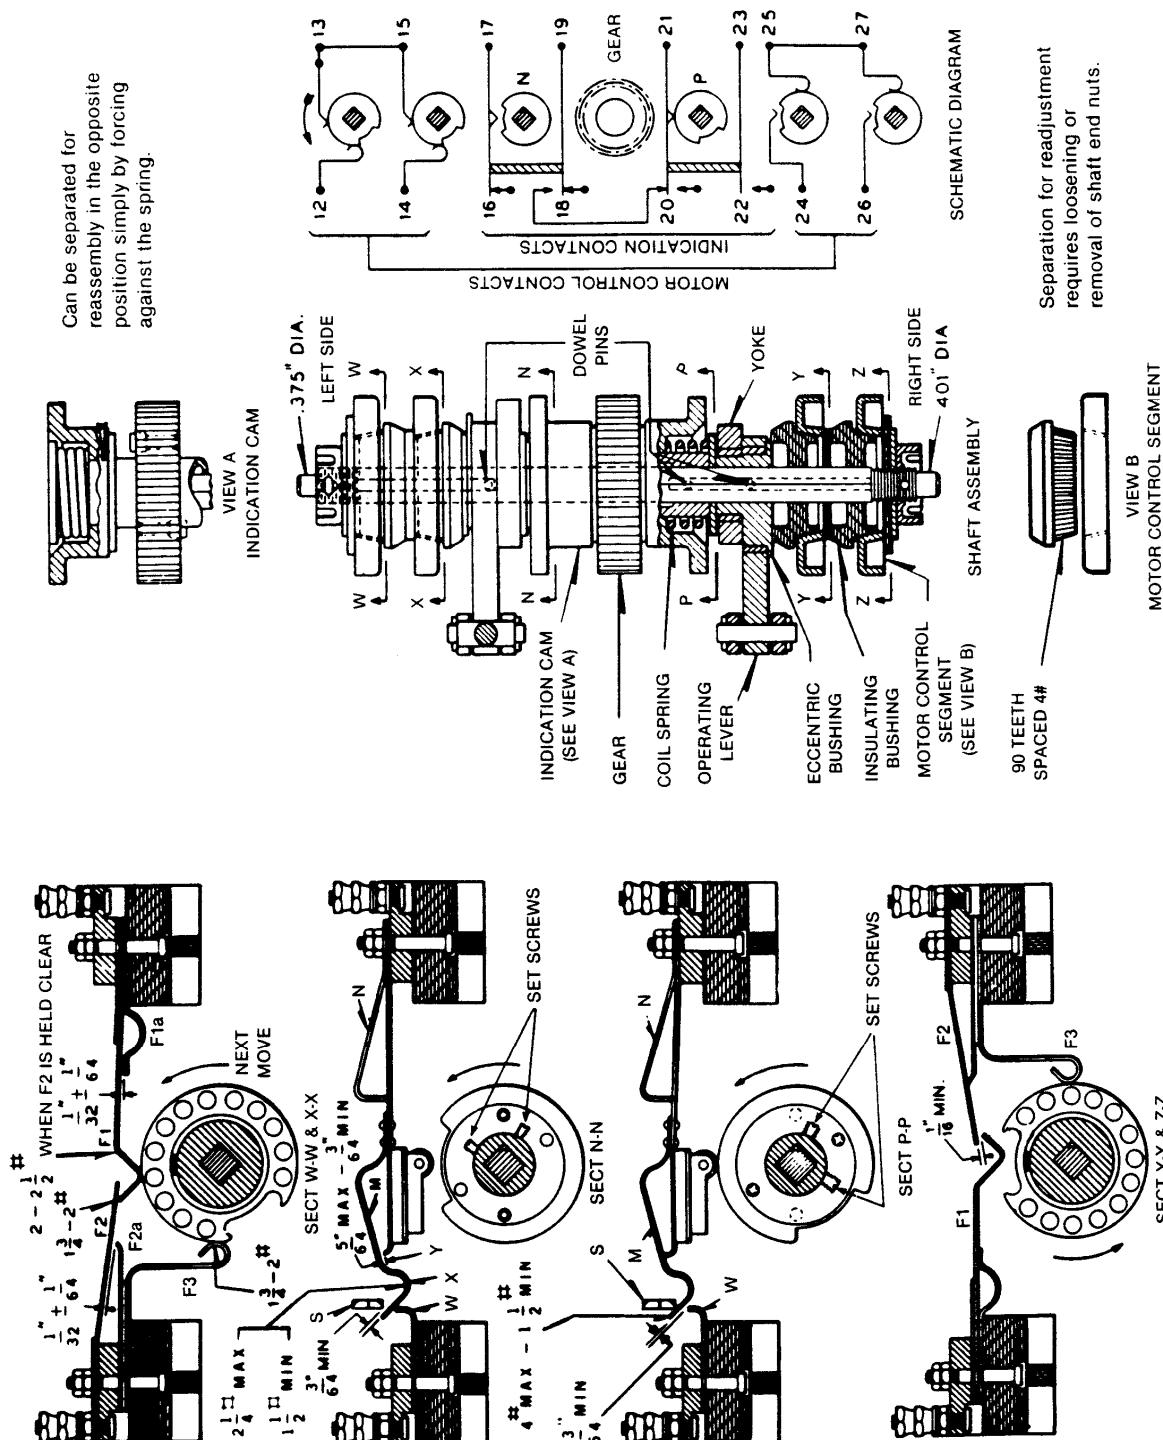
Circuit Controller Adjustment and Shaft Assembly Diagram
